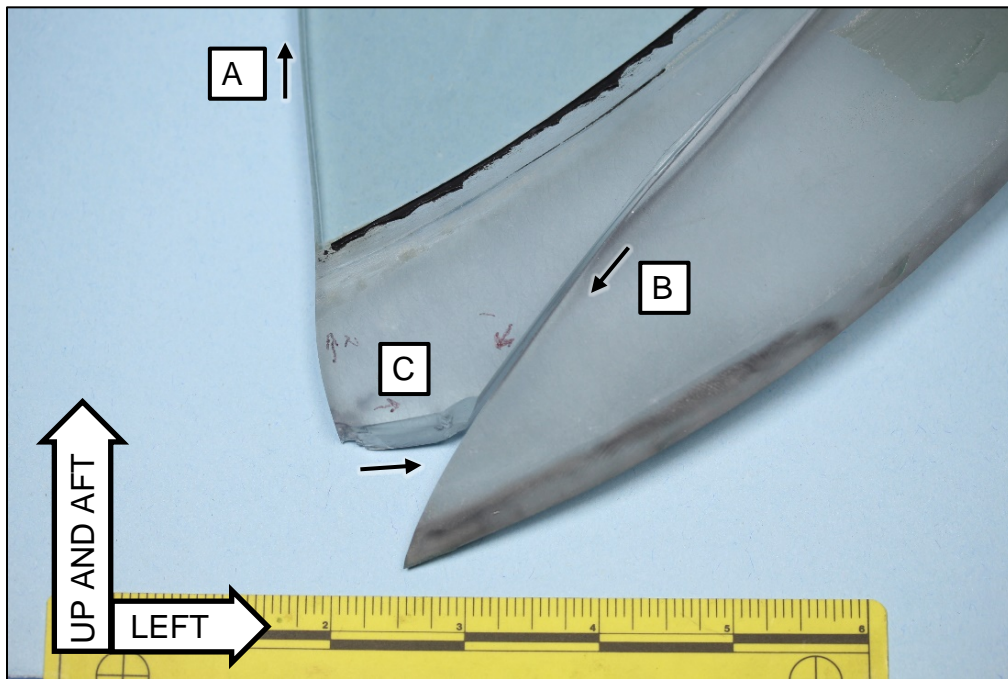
Fracture pattern at the forward end of fracture A and fracture B after both pieces of the windshield with mating sides of fracture B were removed from the windshield frame.
